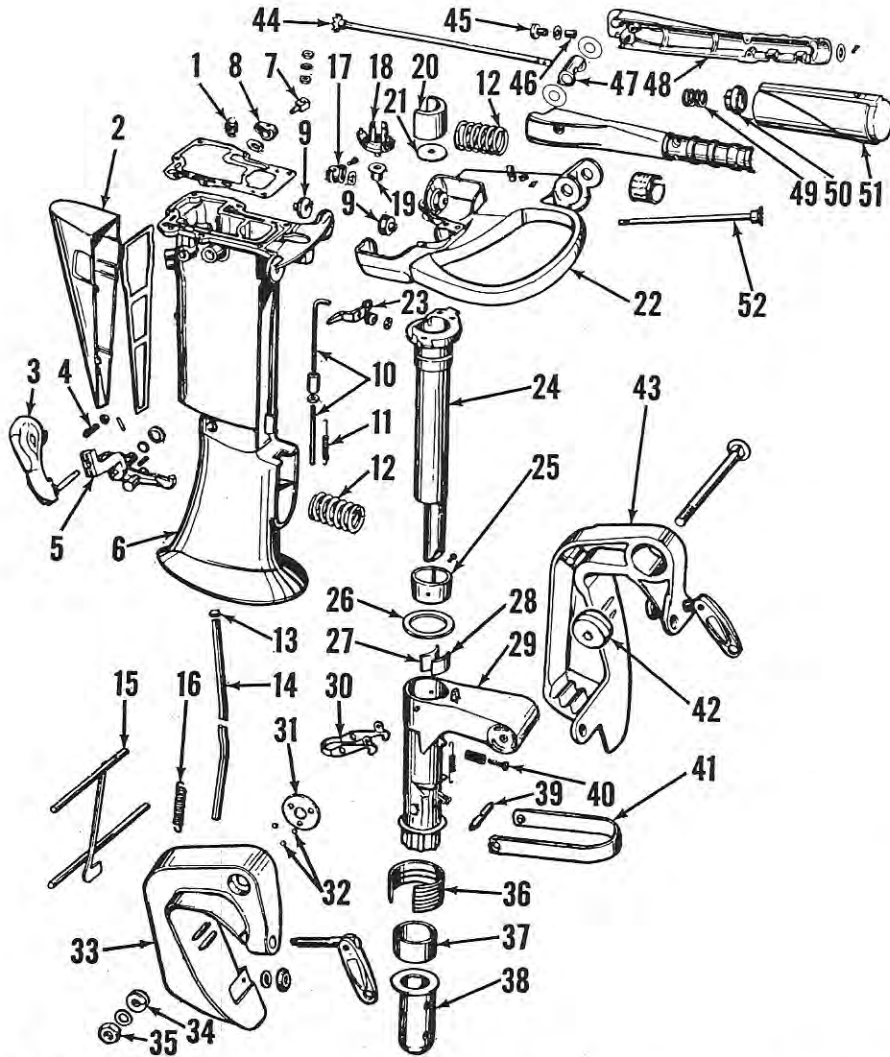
Exploded view of drive shaft housing, stern bracket and associated parts used on models 5D12 through 5D16.
